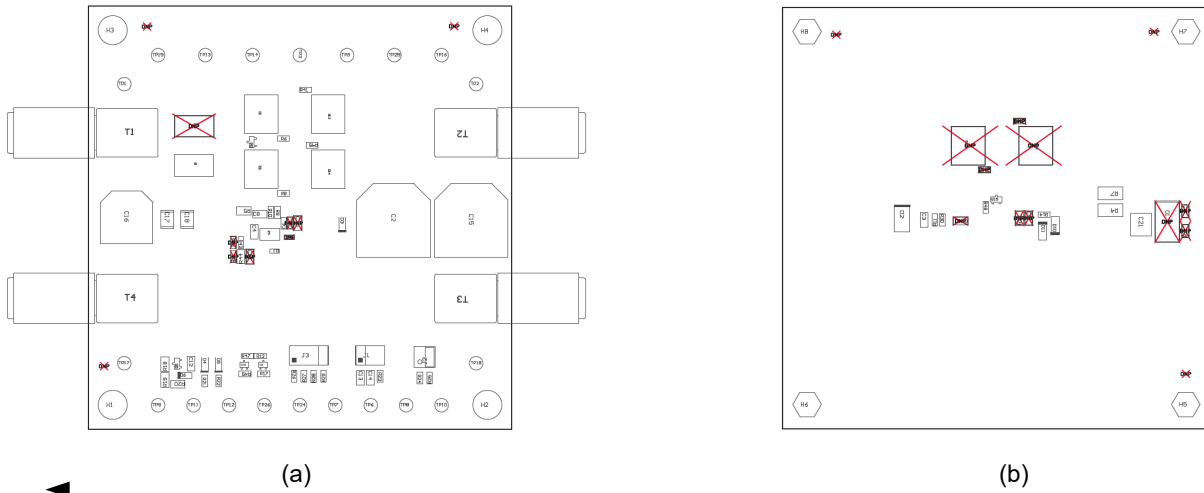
TPS48111Q1EVM Board (a) Top Assembly (b) Bottom Assembly
